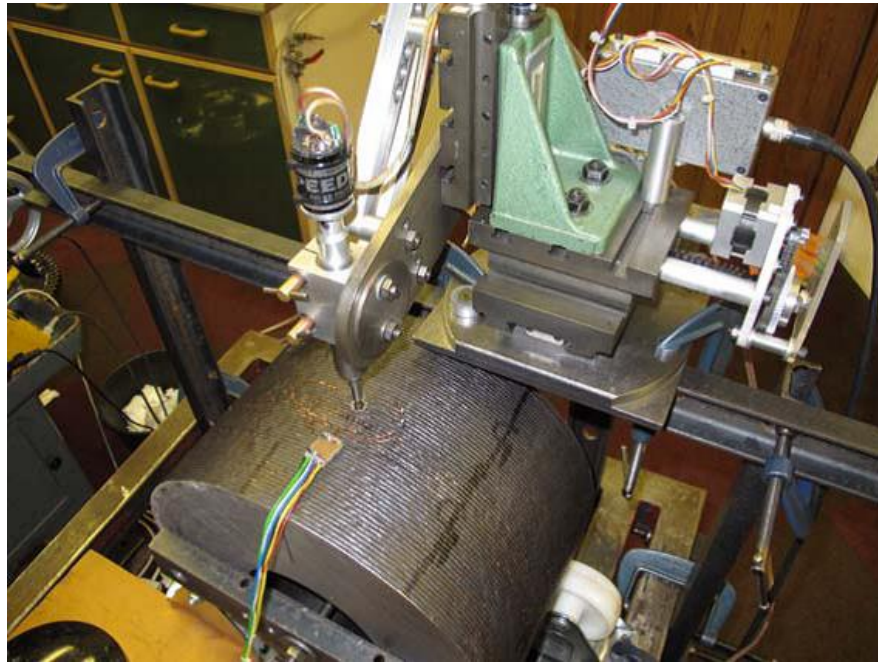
Example of the setup utilised in the Stresscraft ICHD process - Showing the customised precision milling equipment positioned around the weld clad cylinder utilised by Stresscraft (196) in obtaining residual stress measurements.
